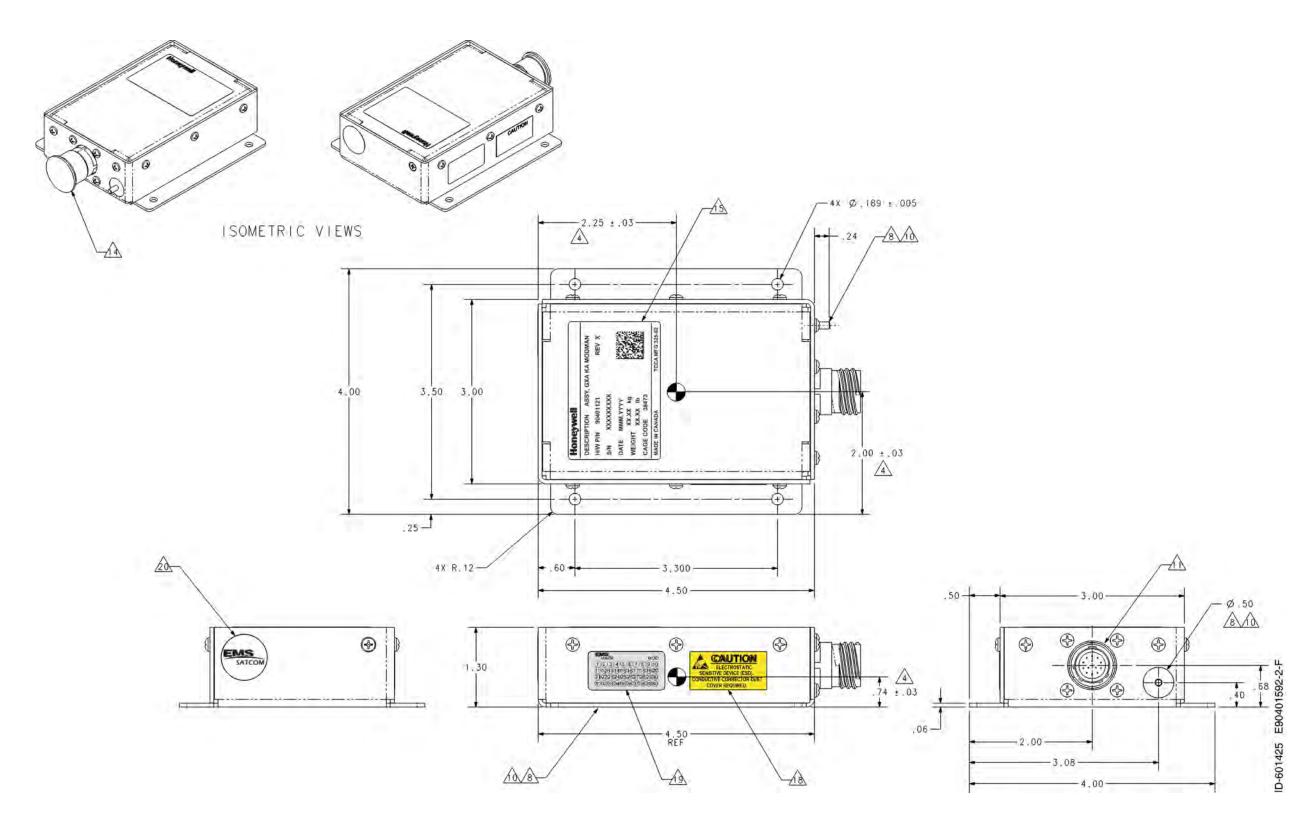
(Sheet 2 of 2) APM Outline and Installation Drawing (90401592, REV F)
